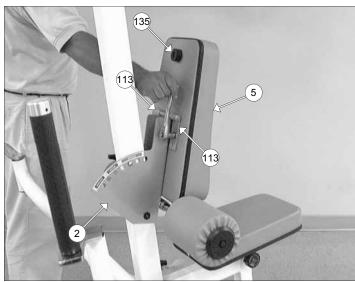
Attach a Rubber Bumper 3/8 X 1 1/2 (#135) to the Bench Press Back Pad (#5) using one Hex Head Cap Screw 3/8-16 X 1 1/2 (#95). Next, attach the Bench Press Back Pad (#5) to the Metal Hinges (#113) using two Hex Head Cap Screws 3/8-16 X 1 1/4 (#96), and two Flat Washers SAE 3/8" (#93).
